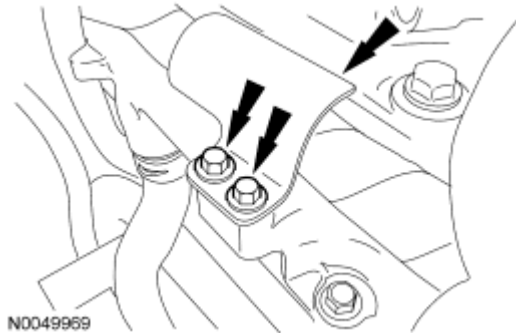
Locating Wiring Harness Retaining Bracket & Bolts
